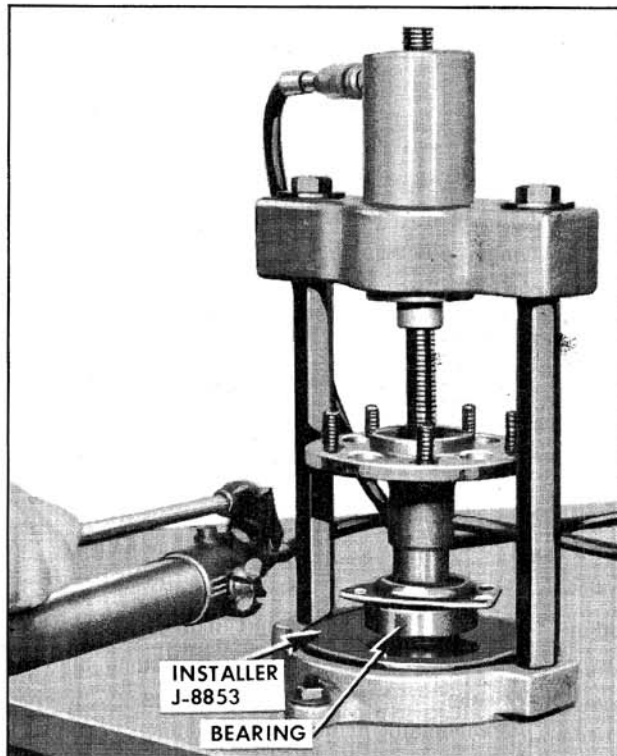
Installing Axle Bearing (33 through 52 Series)
